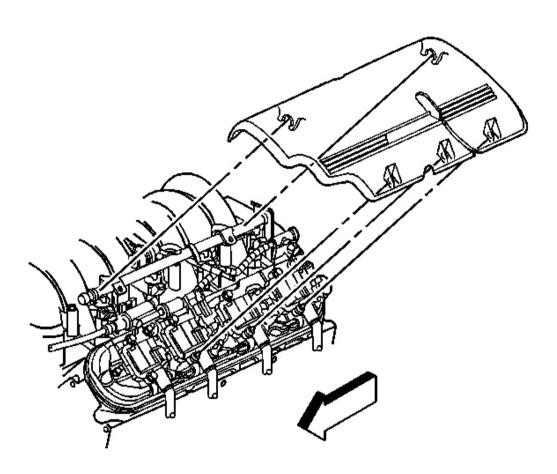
Generator Fuel Rail Cover Courtesy of GENERAL MOTORS CORP.
